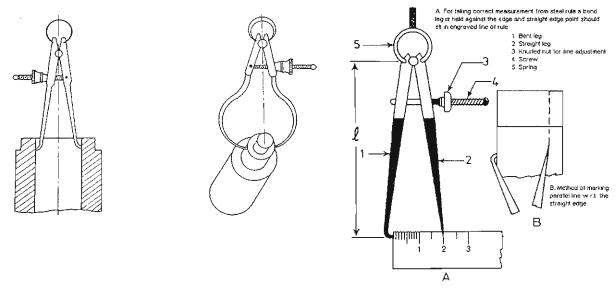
(a) Inside Caliper Fig 1.2 (b) Outside Caliper Fig 1.2 (c) Jenny Caliper
